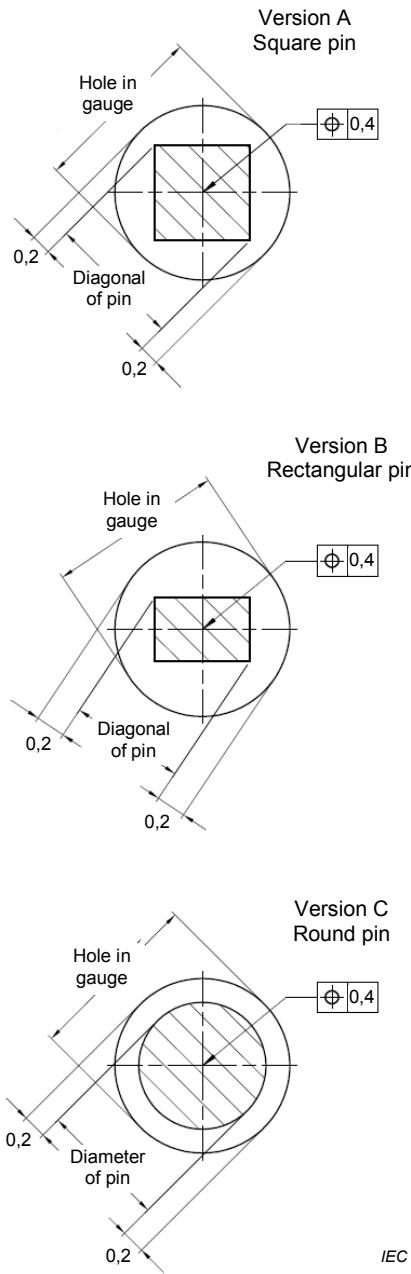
Examples for terminal shapes and position tolerances
